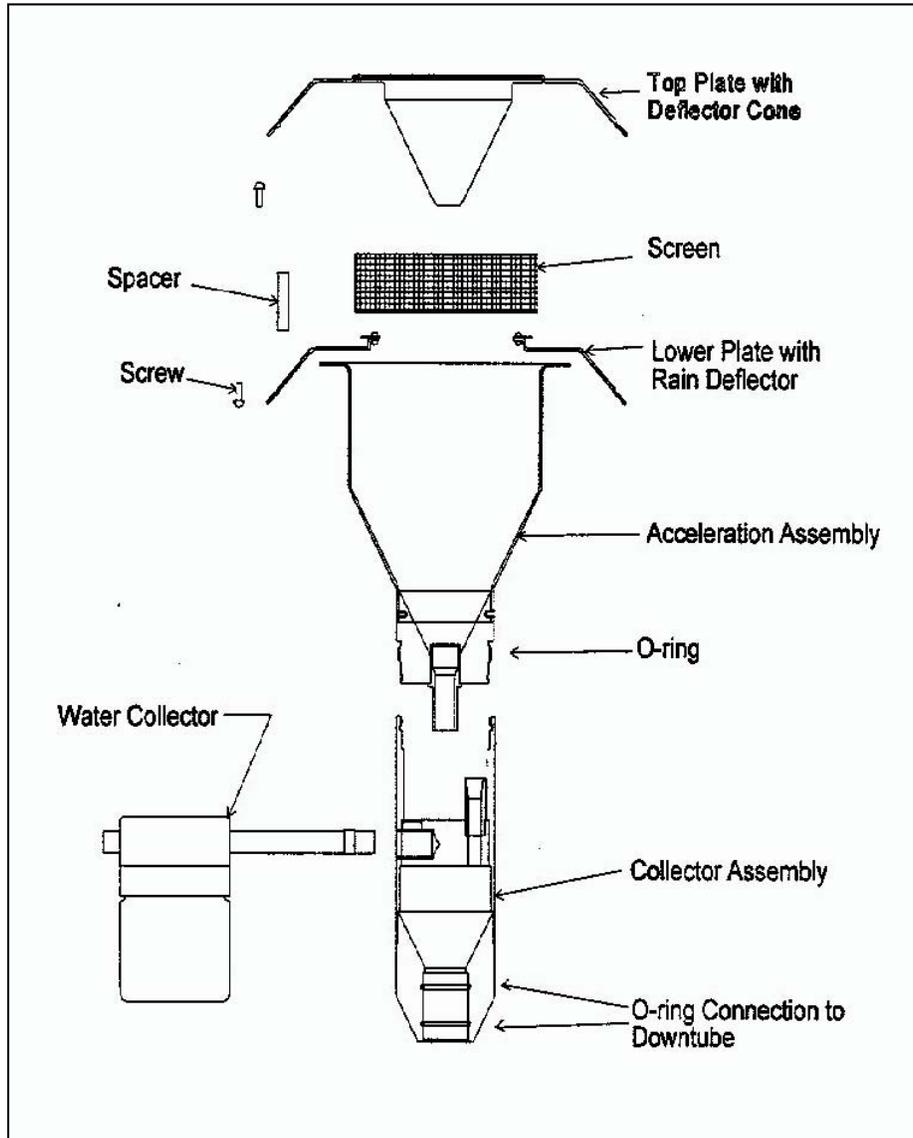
Exploded Cross-Sectional View of PM₁₀ Sampler Inlet Head
